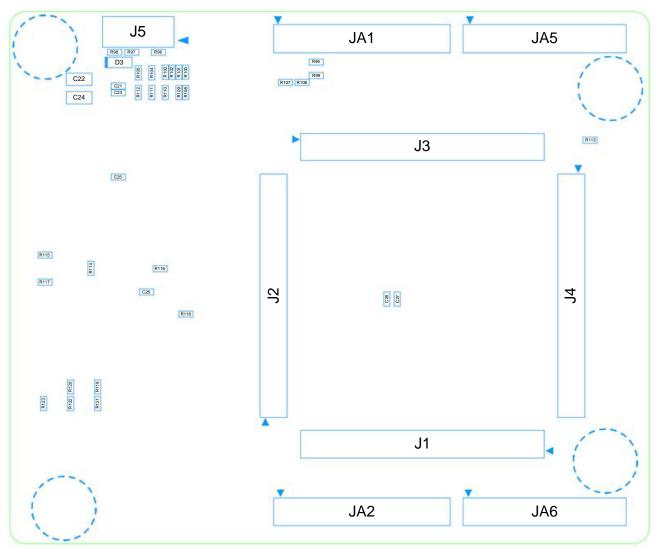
below shows the component placement on the bottom-side of the RSK board.
